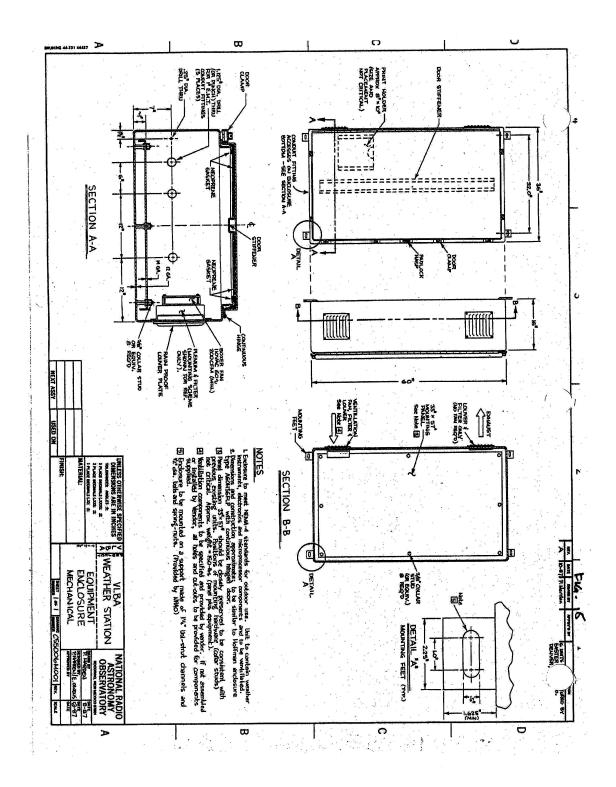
VLBA Weather Station Equipment Enclosure, C55006M001
